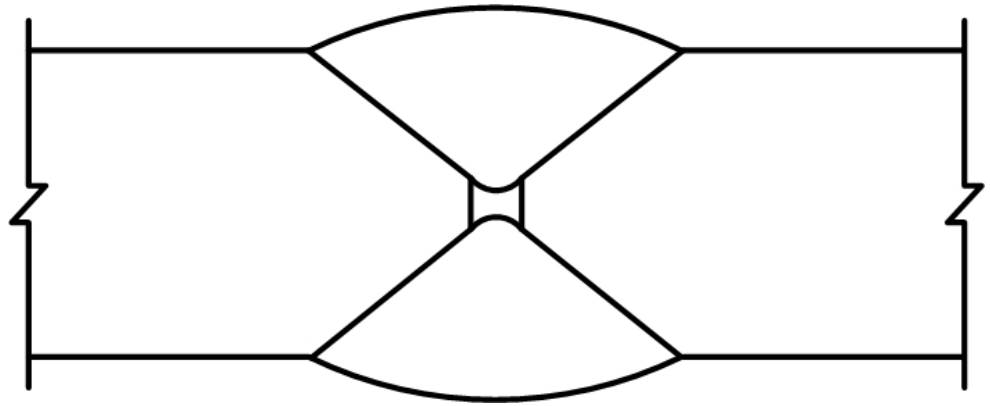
Incomplete Penetration of a Double V-Groove Weld
